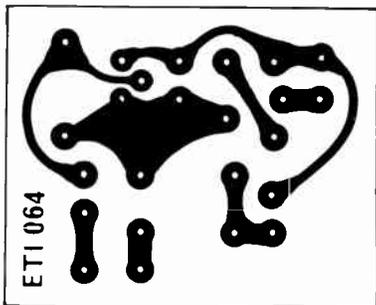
Printed circuit board layout. Full size 50mm x 40mm.
